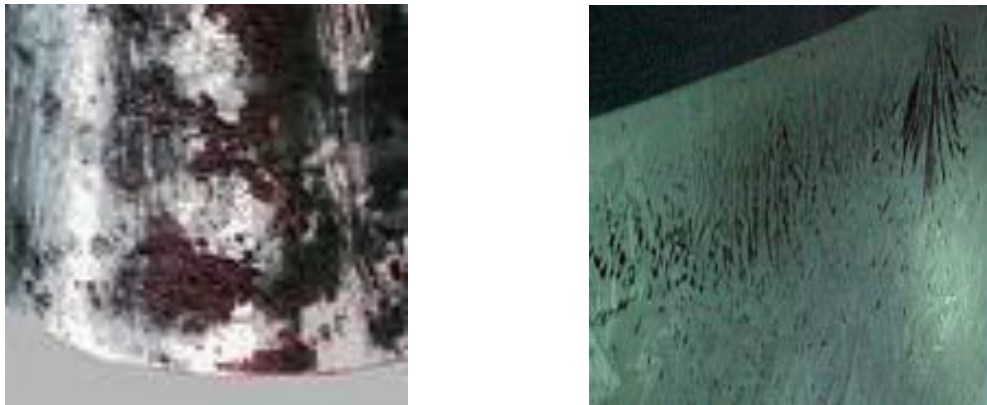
Fretting corrosion on metal plates (ILZRO, 2009)
